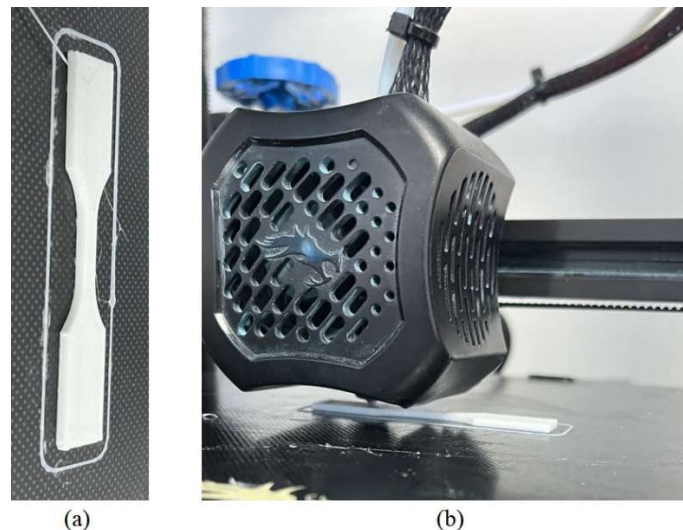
(a) PLA specimen. (b) head printer during processing.
